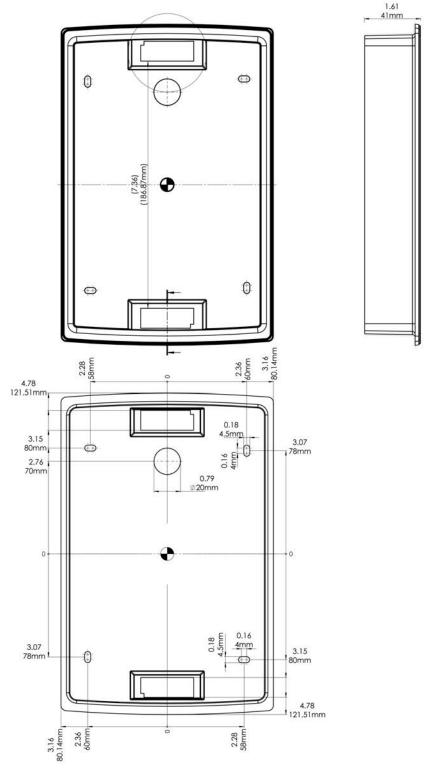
Dimensional drawing, back box for surface mount touchscreen wall control unit (dimensions are in inches/mm)
